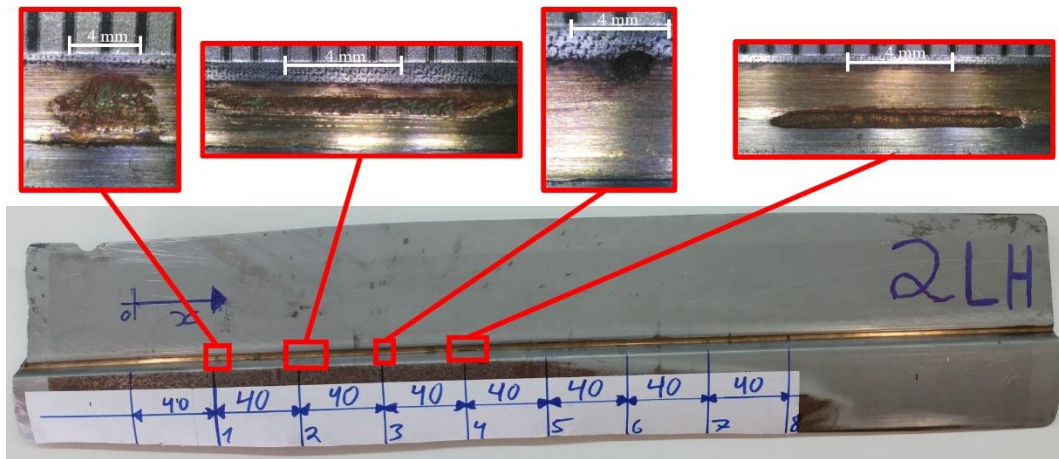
Sample 2LH with enlarged defects 1 to 4.
